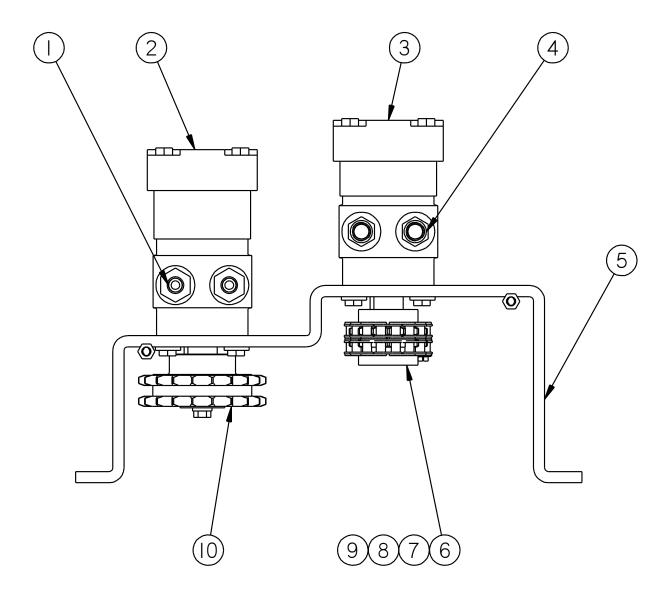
Pump/Mixer Motor Assembly: PN 44832
